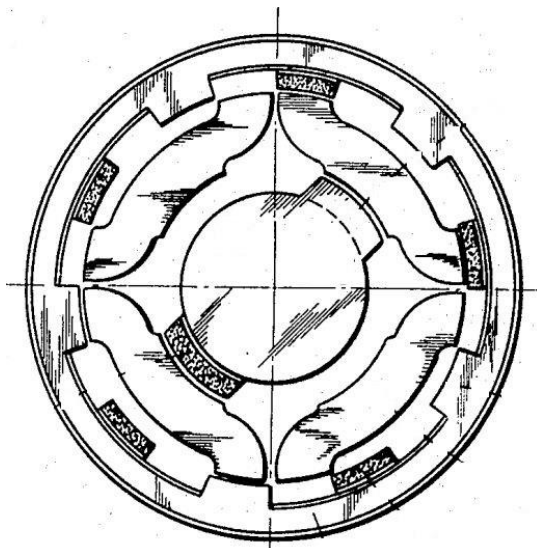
Radial magnetic gear with wound stator teeth and pm [64]
